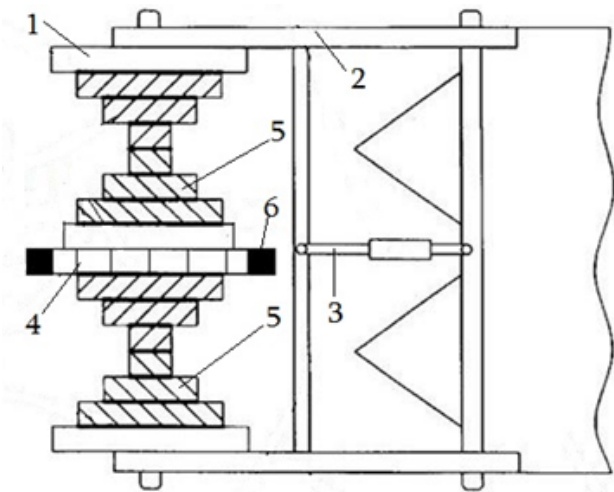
The scheme of the Rotary Crusher of the Potato Digger with Gear Drive Wheel (composed by the authors).
